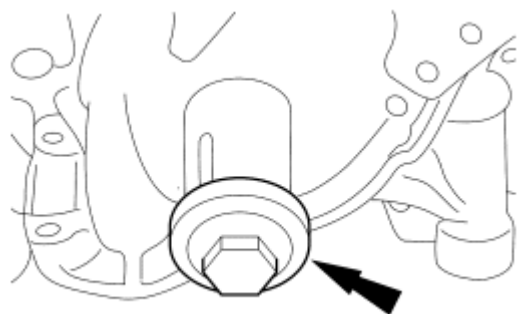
Installing Coolant Pump Drive Pulley Using Special Tool (303-S455)
